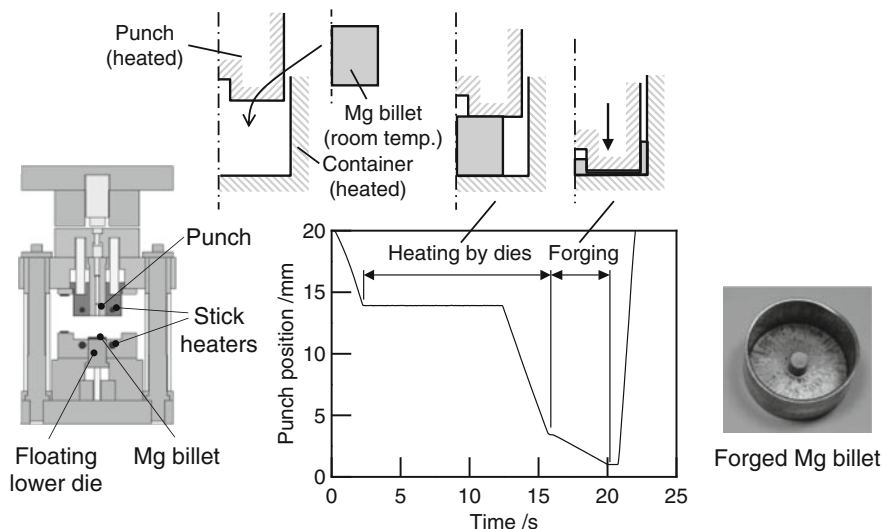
Die forging method of magnesium alloy using servo press [12]
